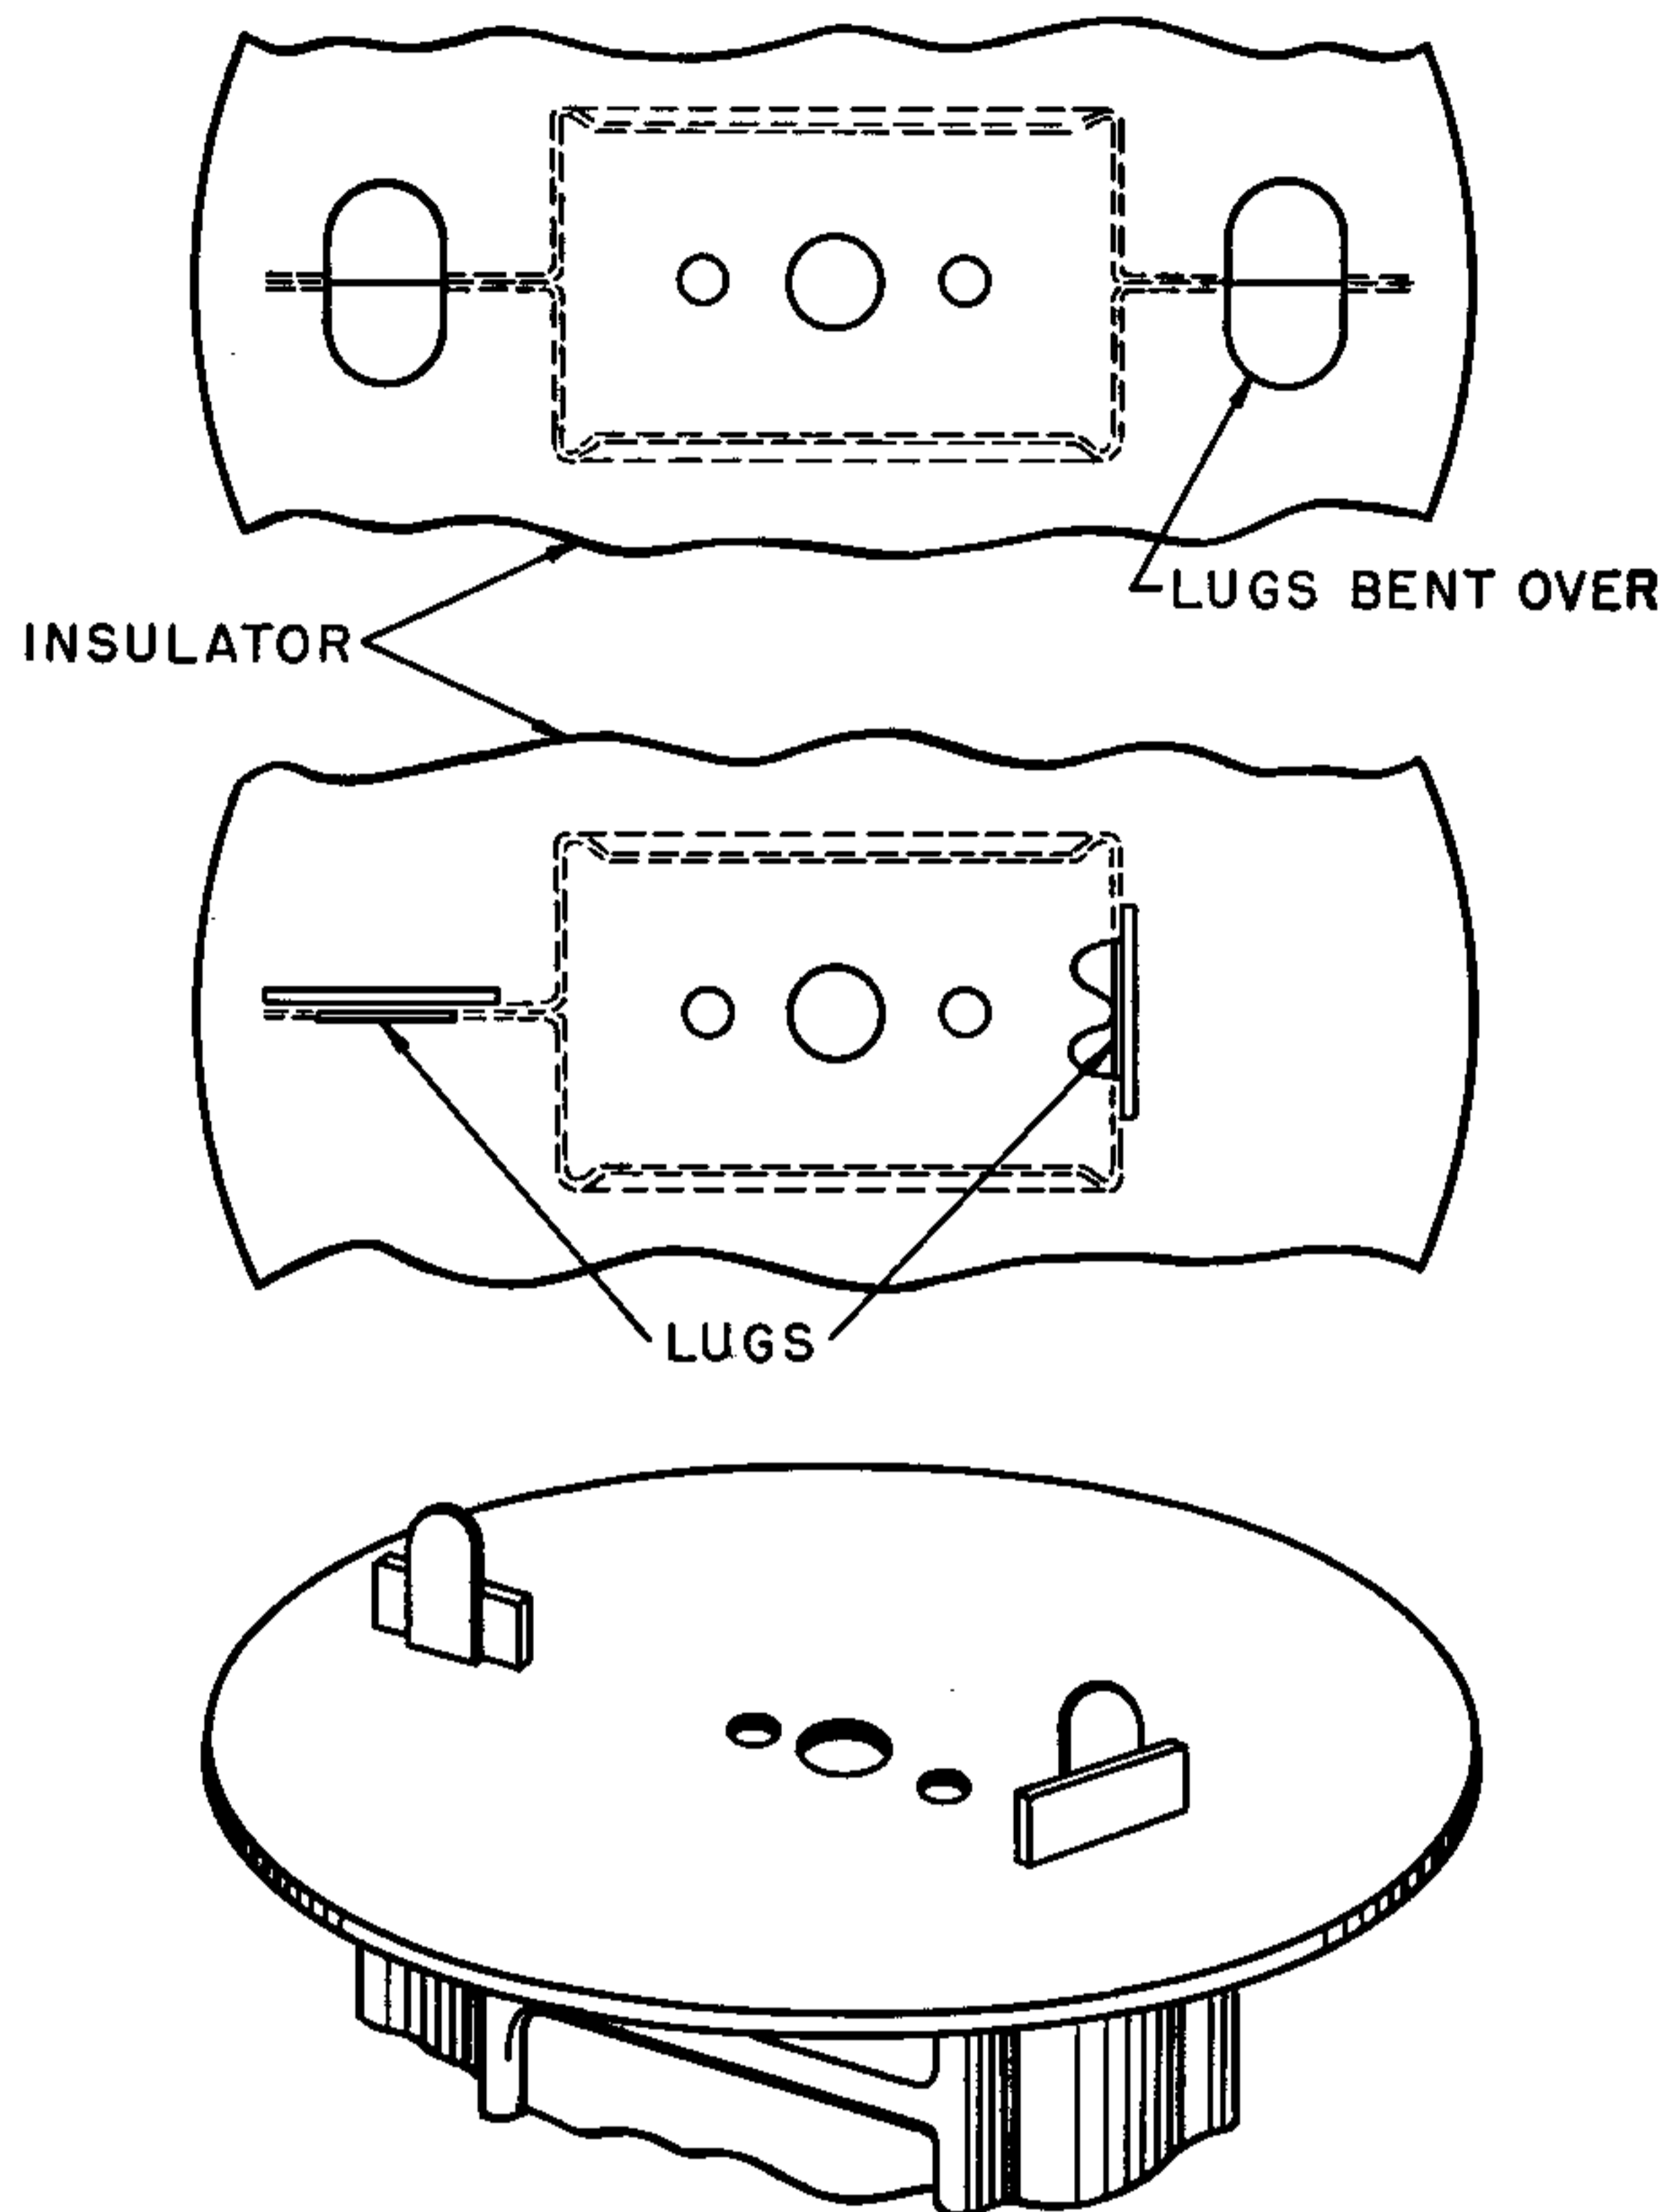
The upper drawing shows the old form of inserting two lugs through the insulator and bending them over to secure the anode. The lower two figures show the new method of putting the lugs at right angles and welding the locking strap to the lug.
